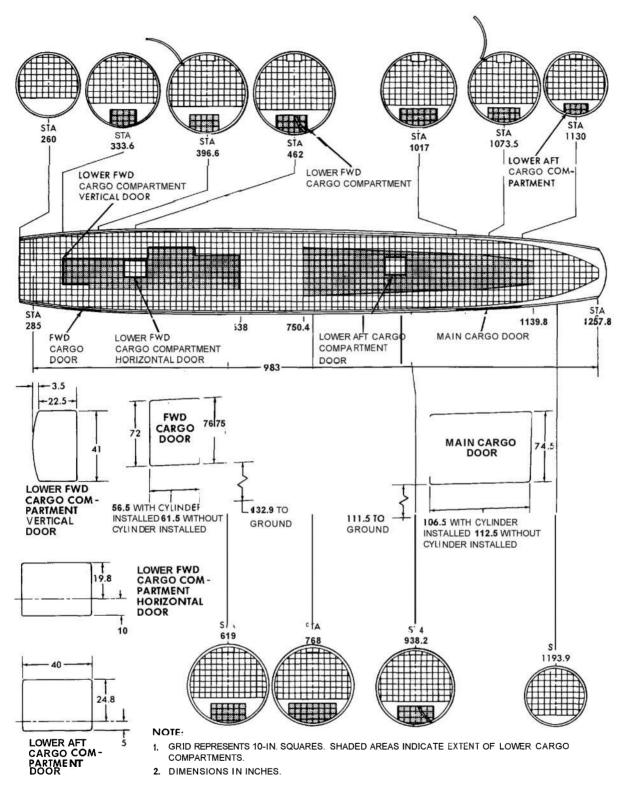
DIMENSIONS OF CARGO COMPARTMENT AND DOORS, C-121/1049H AIRCRAFT
